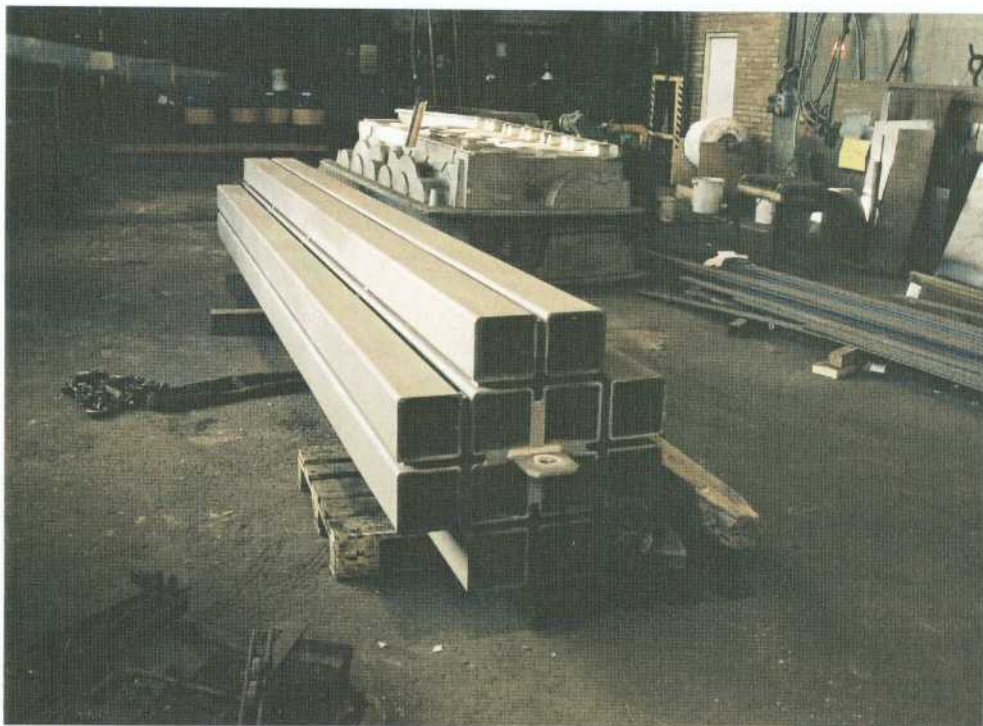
Welded cassette with 12 channels for BWR fuel assemblies.
